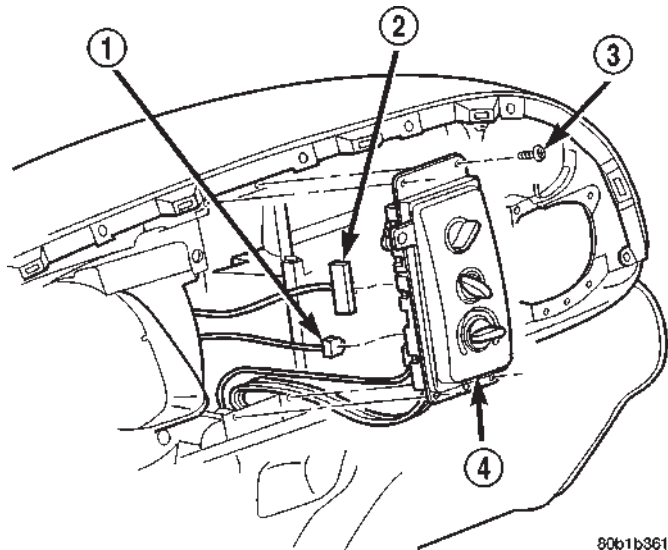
A/C HEATER CONTROL REMOVE/INSTALL
